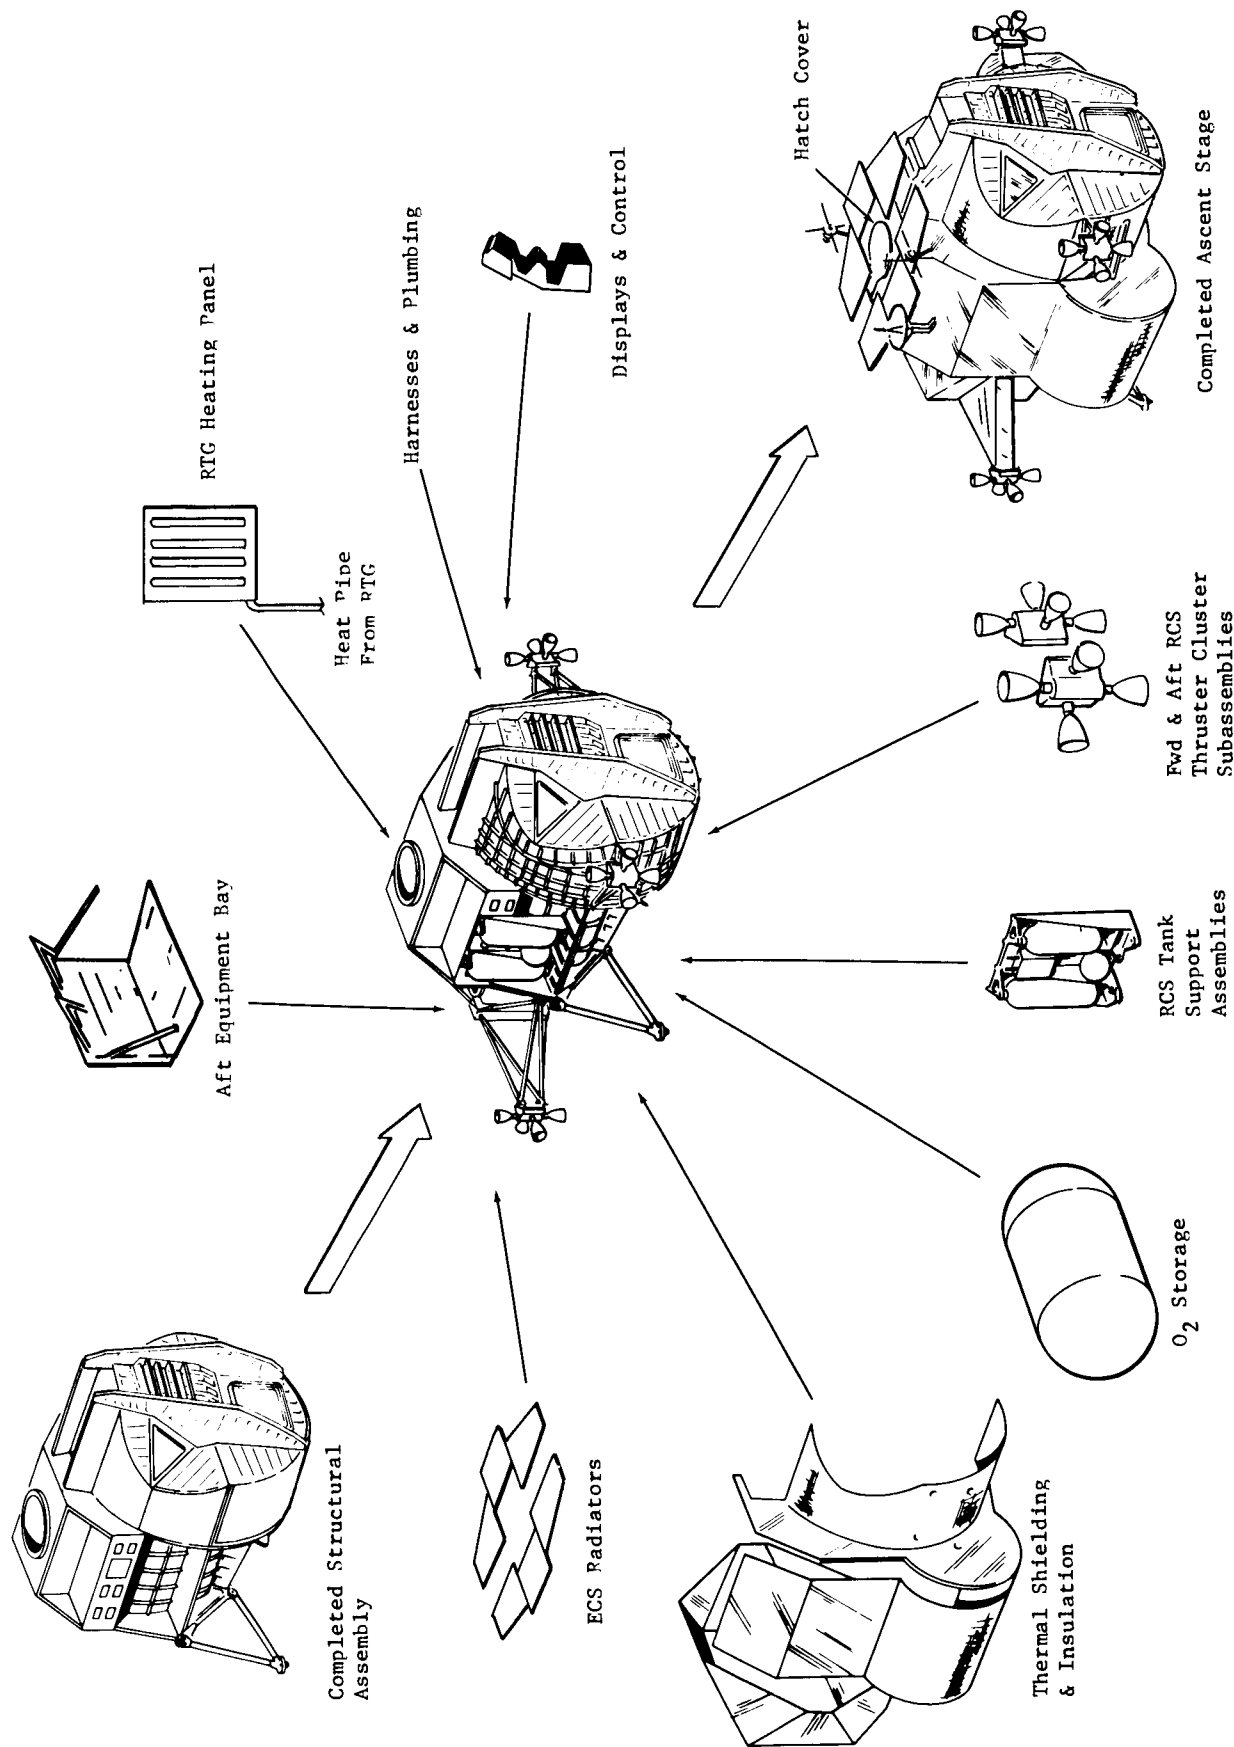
Final Assembly Flow - LEM Shelter "2" Ascent Stage
